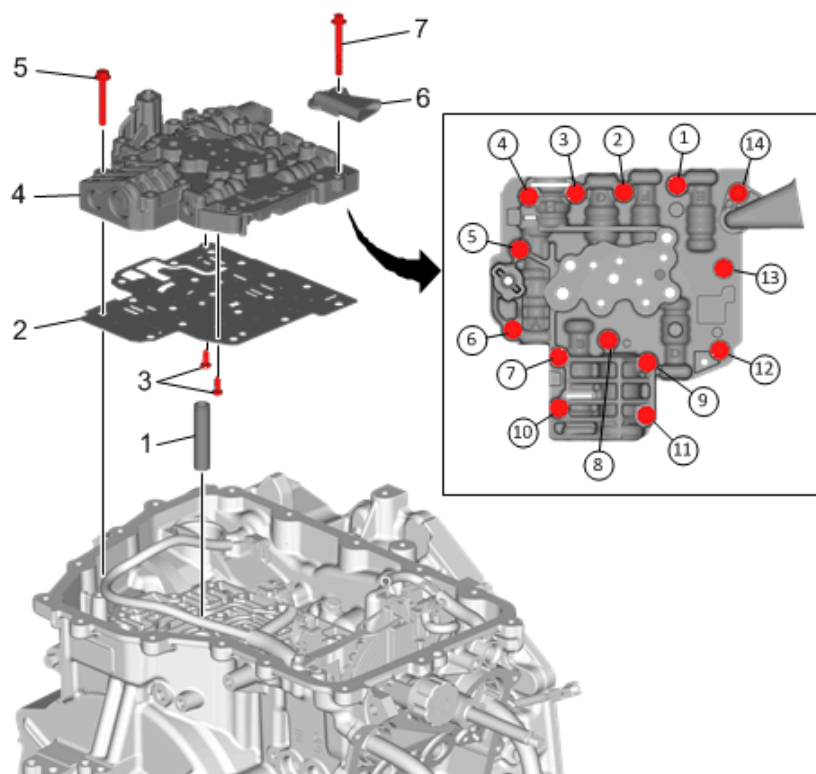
Control Valve (With Body And Valve) With Bolt Tightening Sequence
